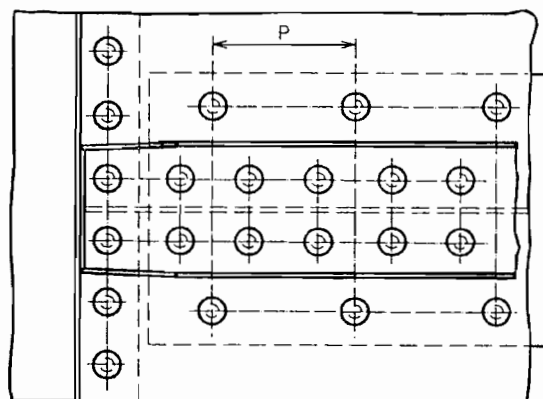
Double-Riveted Butt and Double Strap Joint
